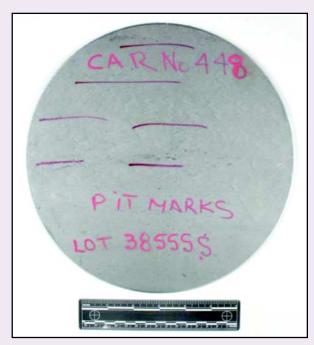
Photograph of the apparent pitting observed on the circular blank
